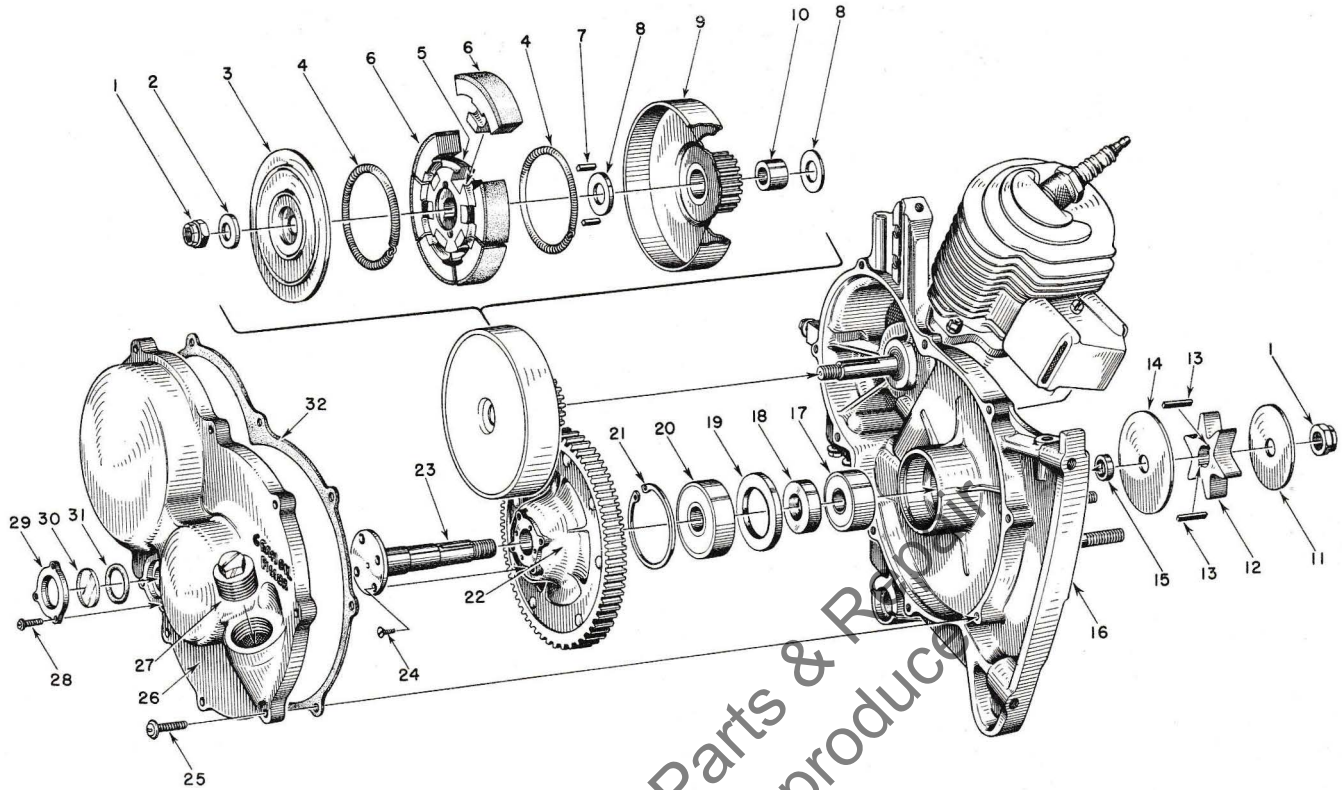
GEAR CASE AND SPROCKET PARTS
